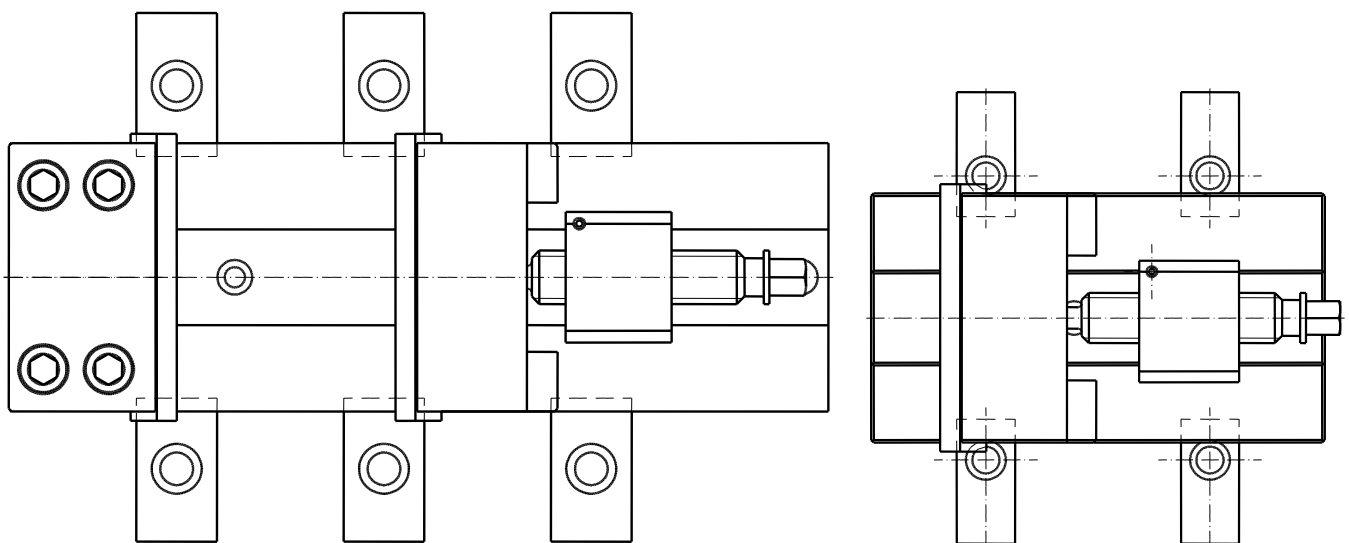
The way of fastening machine vises of 6620 type on machine-tool table.
